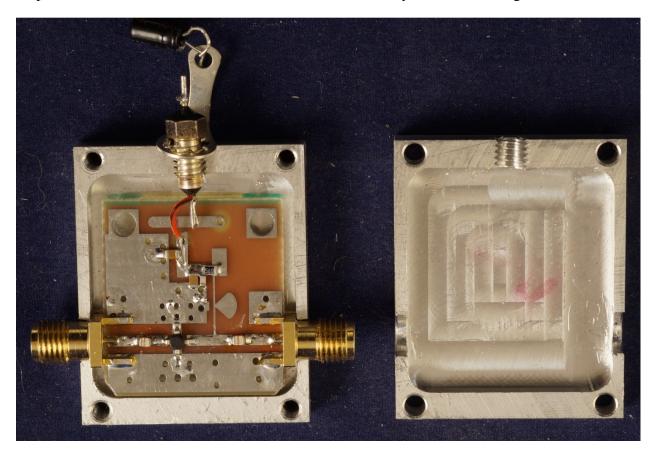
Shimming for soldering SMA edge connectors on very thin PC board
